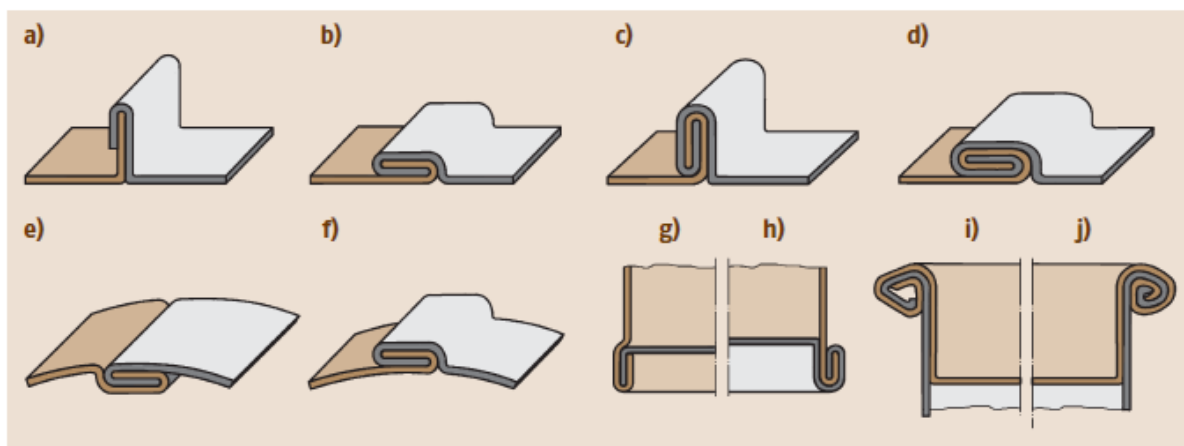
j Examples of different hemming and crimping joints (after [7.232]): (a) Stand-up hemming joint, (b) lying hemming joint, (c) stand-up double hemming joint, (d) lying double hemming joint, (e) inside hemming joint, (f) outside hemming joint, (g) single bottom crimping joint, (h) double bottom crimping joint, (i) trapezium crimping joint, (j) taper crimping joint
